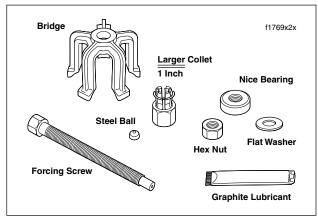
Front Wheel Bearing Remover Tools (Part No. HD-44060)
